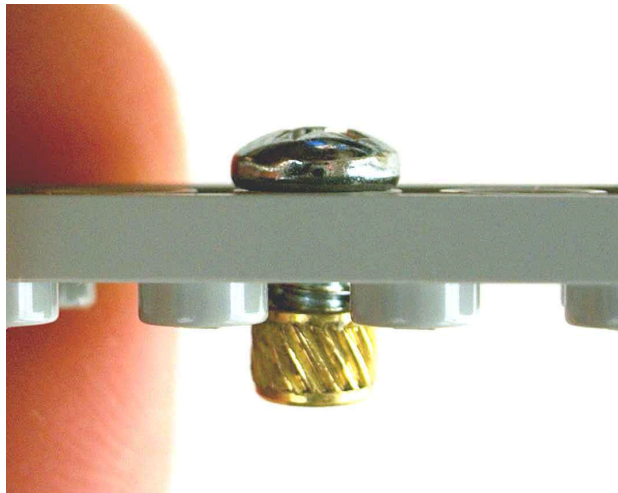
Thread 6-32 pan-head screw through hole in the LEGO plate and attach L-nut to the other side
